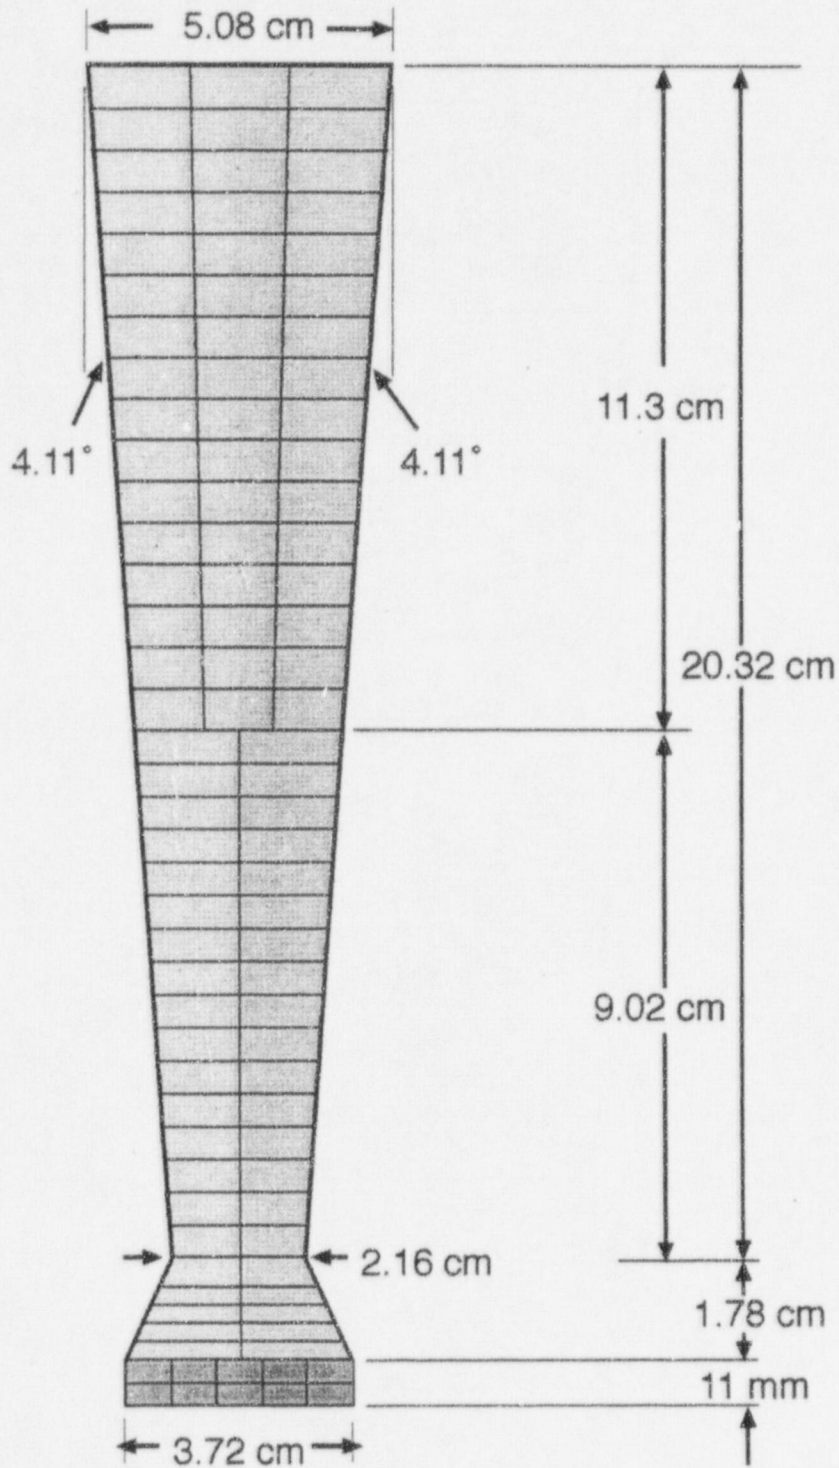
Model of Uniform Thickness Single V Weld
